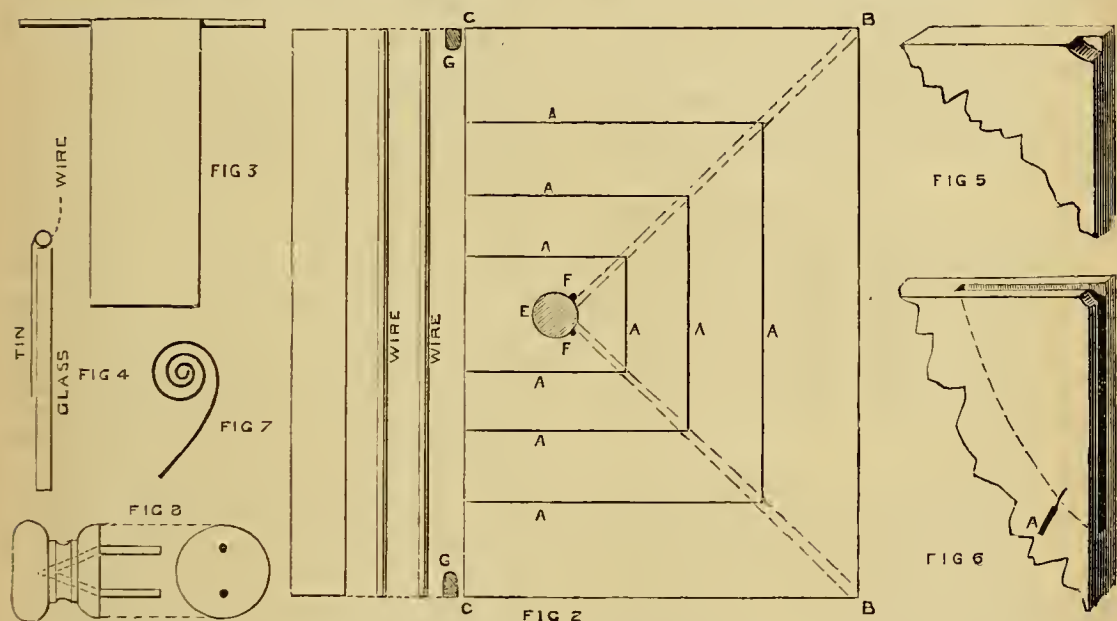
INSIDE OF LEFT HAND OF CAGE VIEWED FROM FRONT. FIG. 3.—TIN AND WIRE FOR HINGEING GLASS. FIG. 4.—SECTION SHOWING METHOD OF HINGEING GLASS. FIG. 5.—MODE OF CUTTING CORNER OF VENEER. FIG. 6.—INCISION IN VENEER TO RECEIVE SPRING. FIG. 7.—DIAGRAM SHOWING DIRECTION OF COIL OF SPRING. FIG. 8.—TURNED KNOB TO CARRY WIRES THAT SECURE GLASSES.
